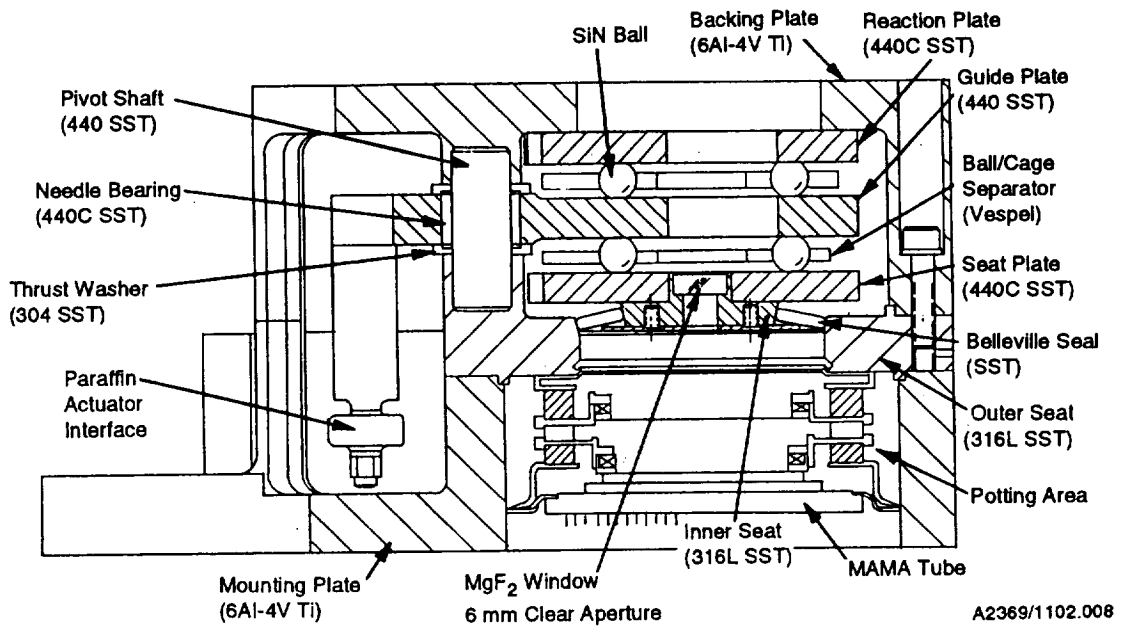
Cross-Section View of the Openable Cover/Vacuum Seal Mechanism
